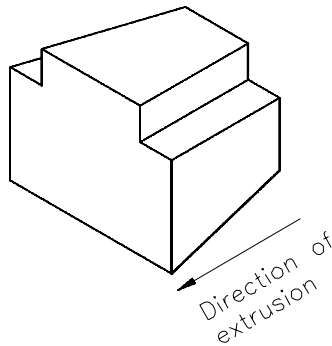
Preview of the feature being extruded using the Mid Plane option
